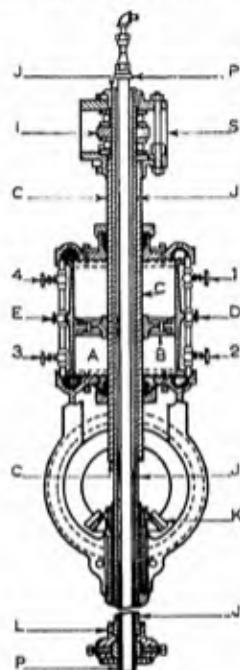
HYDRAULIC FEED FOR DIAMOND DRILL (SULLIVAN)
